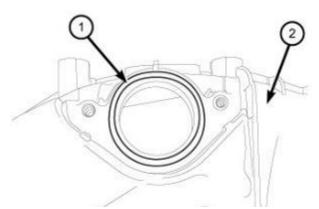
Upper EGR Tube O-ring at Intake Manifold
